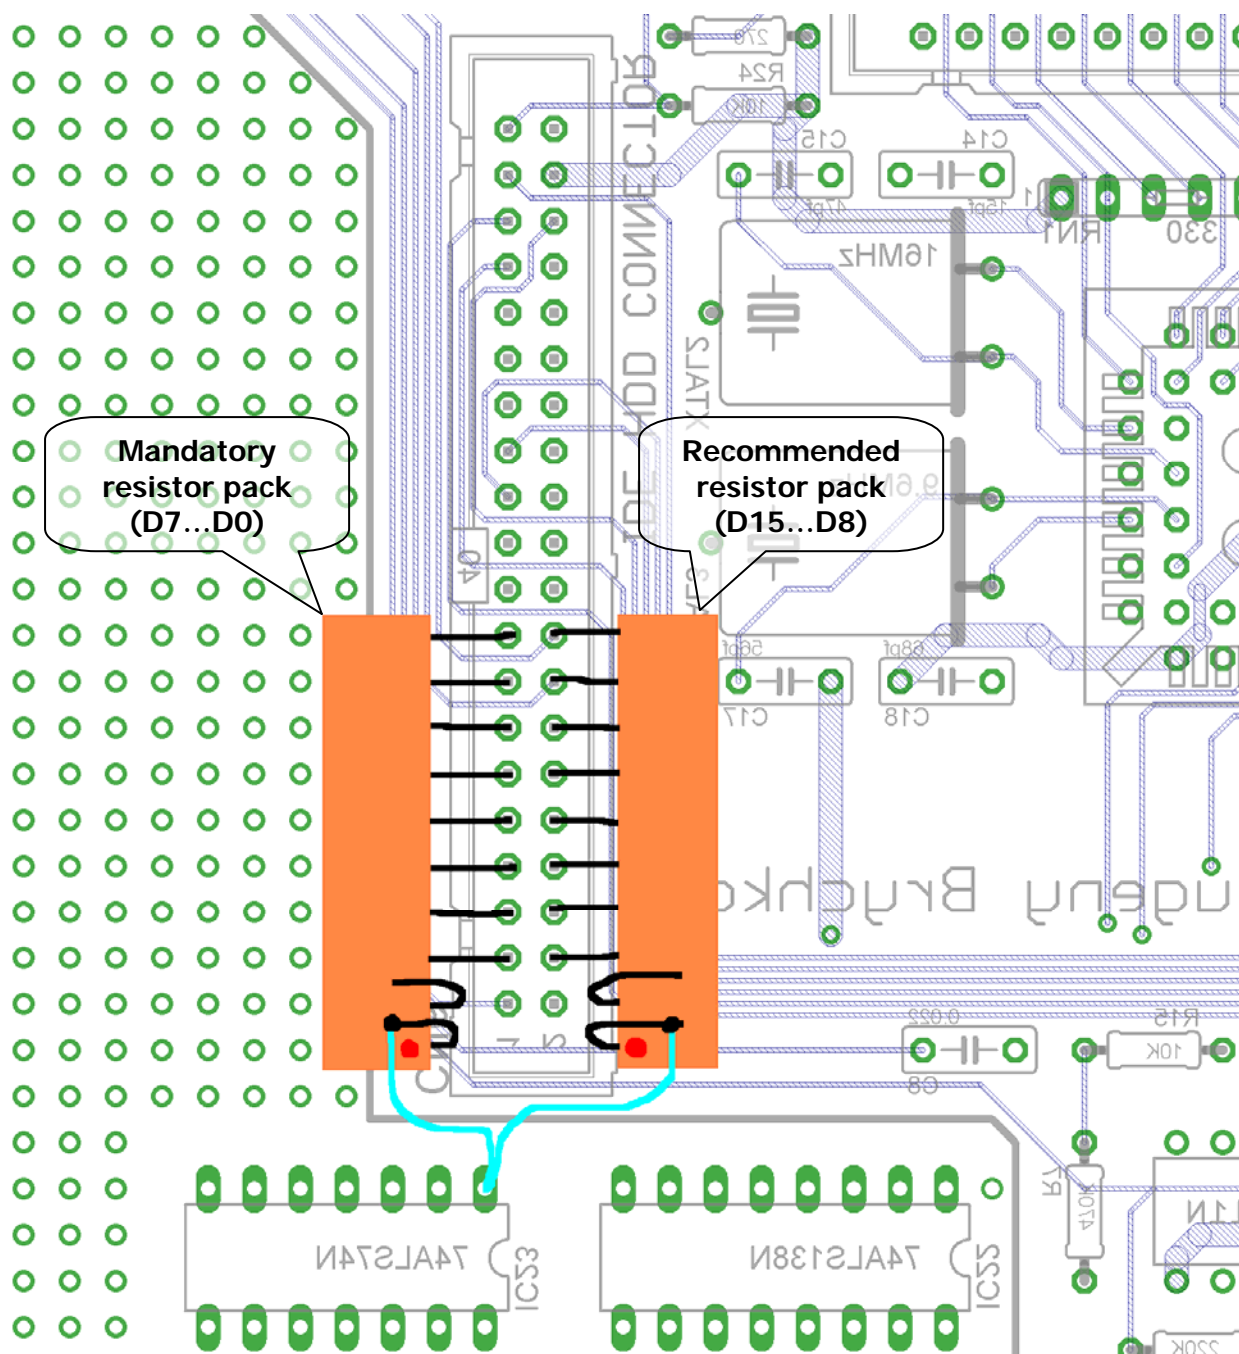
Resistor packs soldered to the IDE connector (board's solder side)
